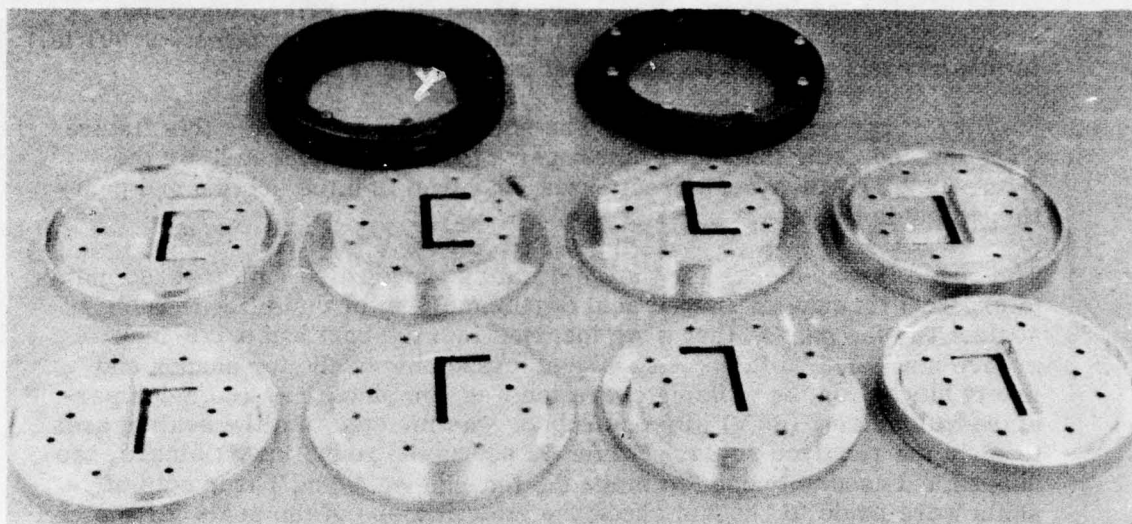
Special Shapes Fixture Inserts and Roller Guides
